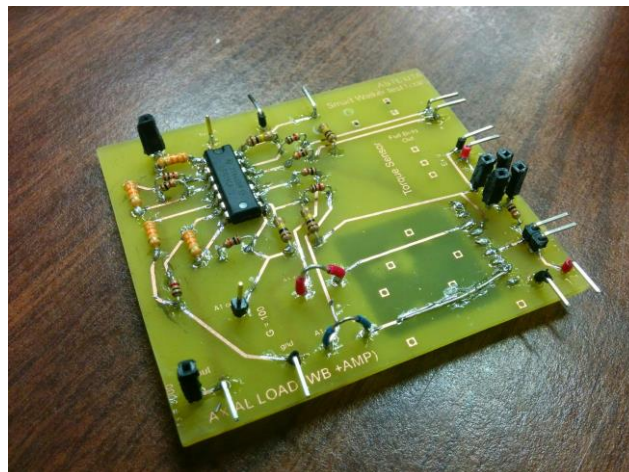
First PCB prototype fabricated to test axial load and torque strain gages
